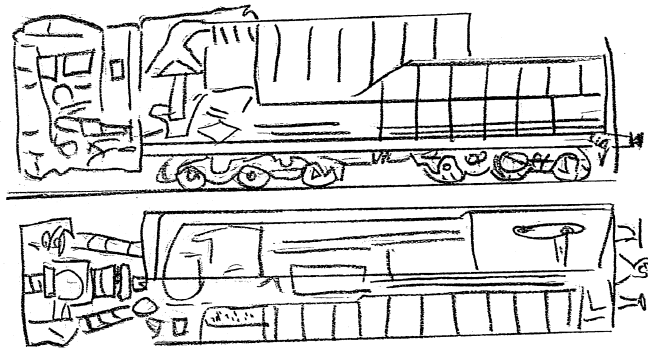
Installation of pulverized-coal equipment on series FD Locomotive. 1-jet for pulverized coal; 2-gas-mixer head; 3-ball coupling of fuel duct; 4-ball coupling of gas duct; 5-telescopic joint of fuel duct; 6-telescopic joint of gas duct; 7-turbo-blower; 8-steam mill; 9-steam jet of mill; 10-distributor head; 11-multicyclone; 12-pulverized-coal bunker; 13-safety valve; 14-stoker to deliver coal to mill; 15-reducer of stoker; 16-Cardan shaft of stoker; 17-guide tube for Cardan shaft of stoker; 18-donkey engine for stoker; 19-conical reducer for fuel conveyors; 20-cylindrical reducer; 21-clutch for fuel conveyors; 22-donkey engine for fuel conveyors; 23-reversing valve for fuel-conveyor donkey engine; 24-feeder of fuel-duct; 25-reversing valve of stoker donkey engine; 26-fuel conveyor
